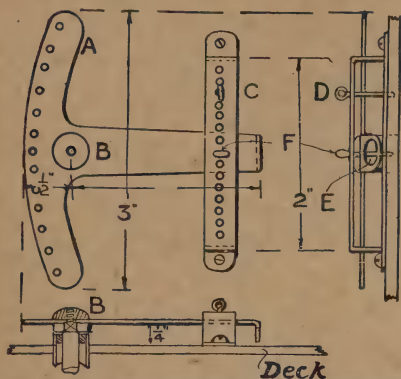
Details of Automatic Steering Gear for Model Yacht
